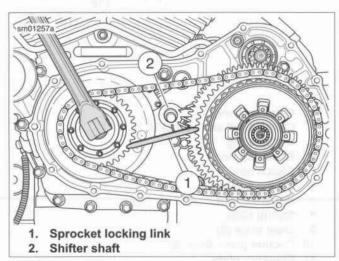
Using Sprocket Locking Link (Part No. HD-46283 or HD-38362) to Loosen Engine Sprocket Nut
